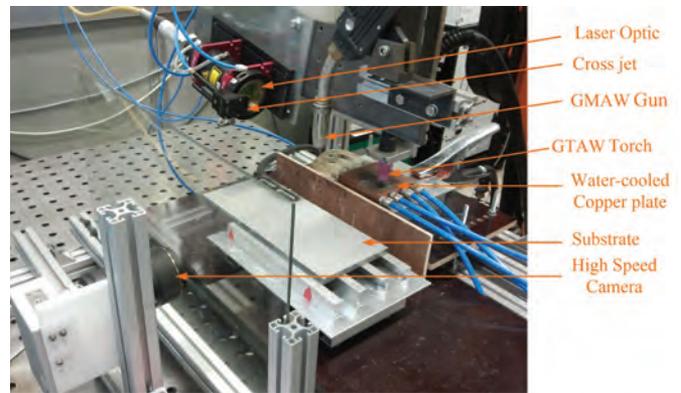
Installation of high-speed camera, GMAW gun, laser, and GTAW torch.
